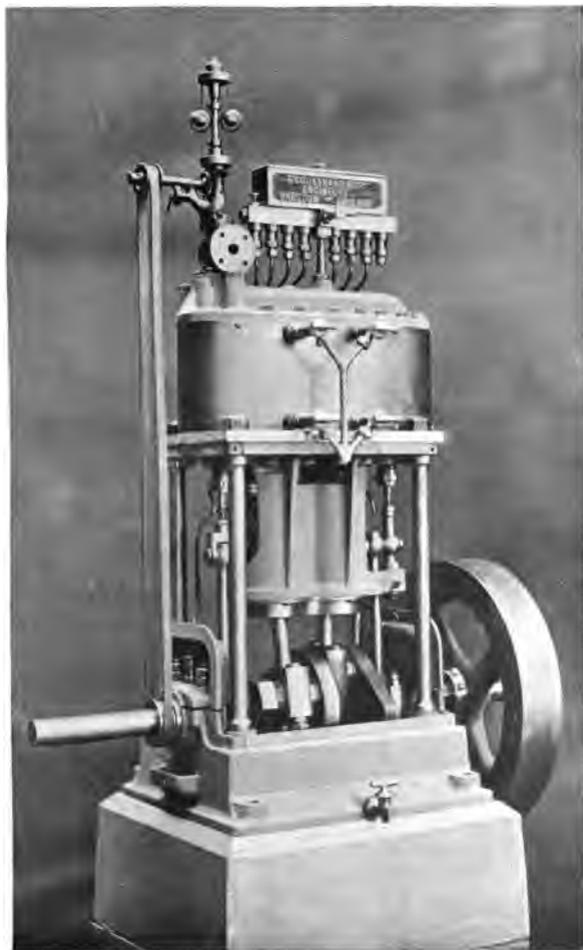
HIGH-SPEED ELECTRIC LIGHT ENGINE, BY MESSRS. COULTHARD & CO.
